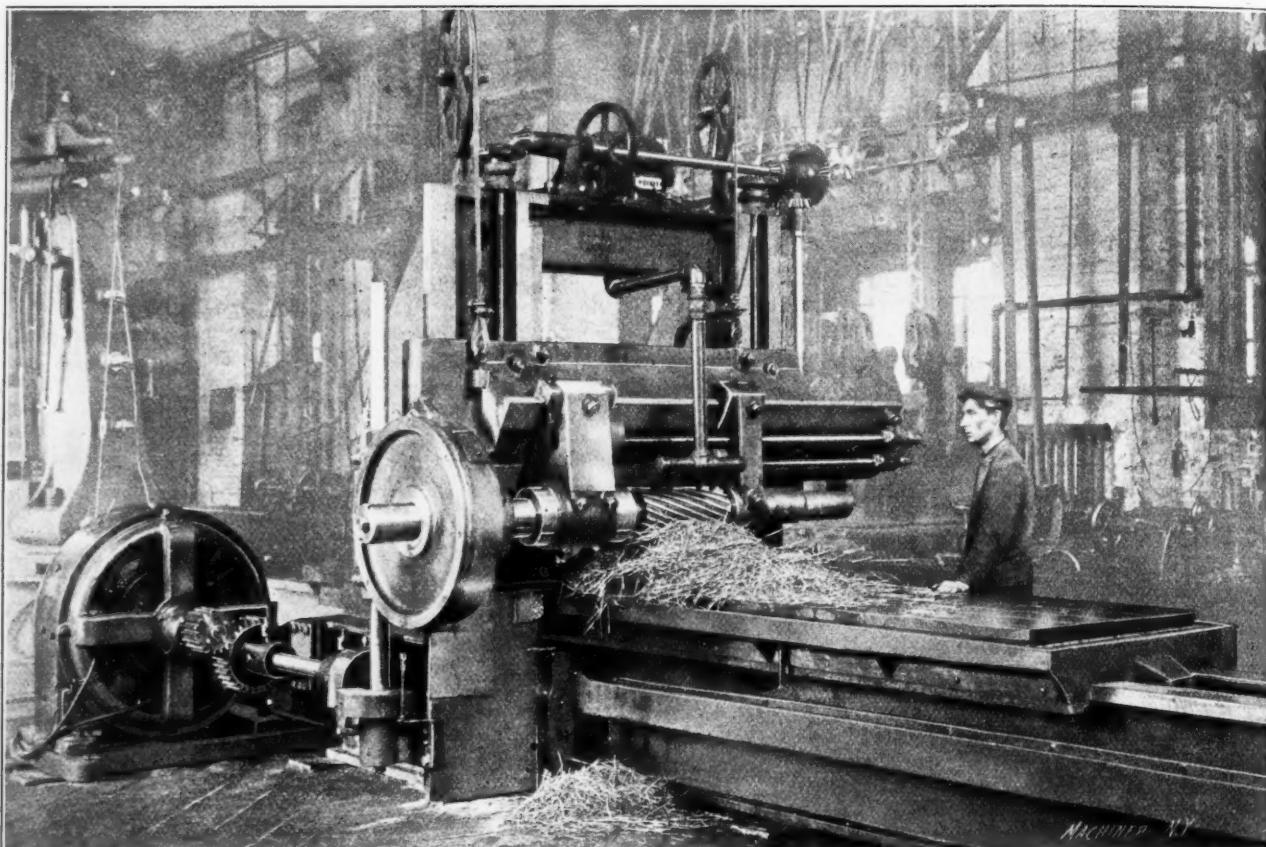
High-speed Milling Cutter in use on High-power Milling Machine of the Planer Type.
